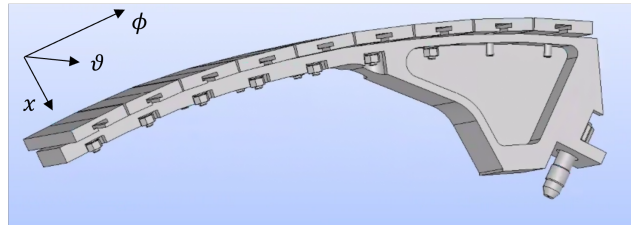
CAD file of TFW panel's fingers. Courtesy of ITER Blanket Section.
